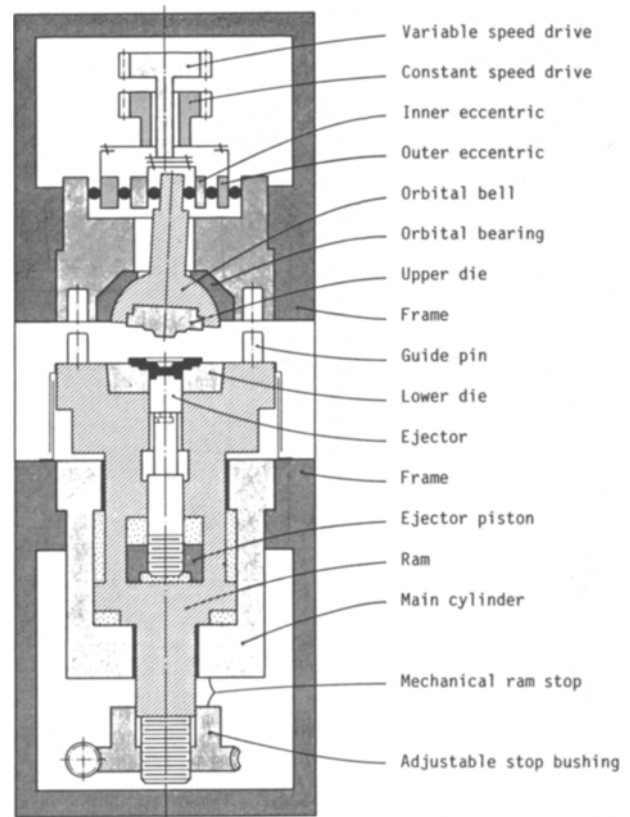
Cross-sectional view of a T-200 (Type 3) machine. The main components are labeled [32].
